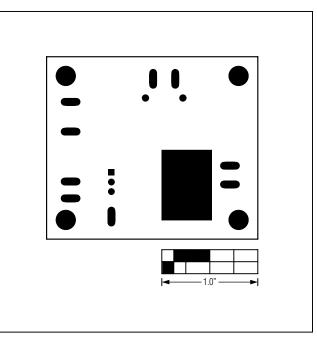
MAX17502G EV Kit Component Placement Guide— Bottom Solder Mask
